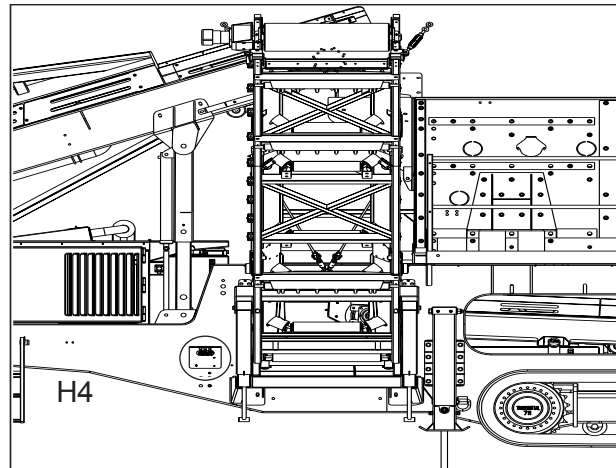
Fines Side Conveyor Control Valve Unit
